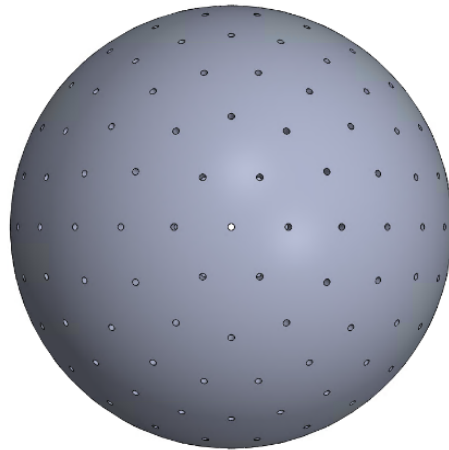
AMM Sphere - Base - CAD - Bottom View
